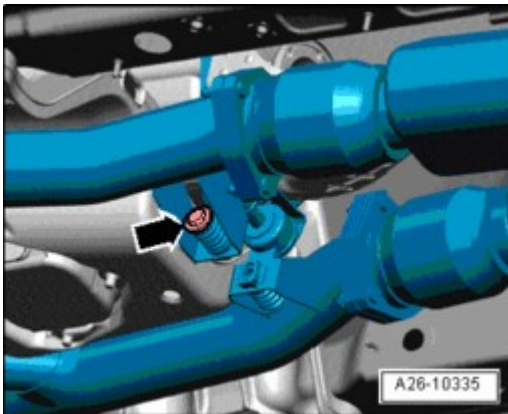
Removing Bolt At Left Exhaust Tract Strap
